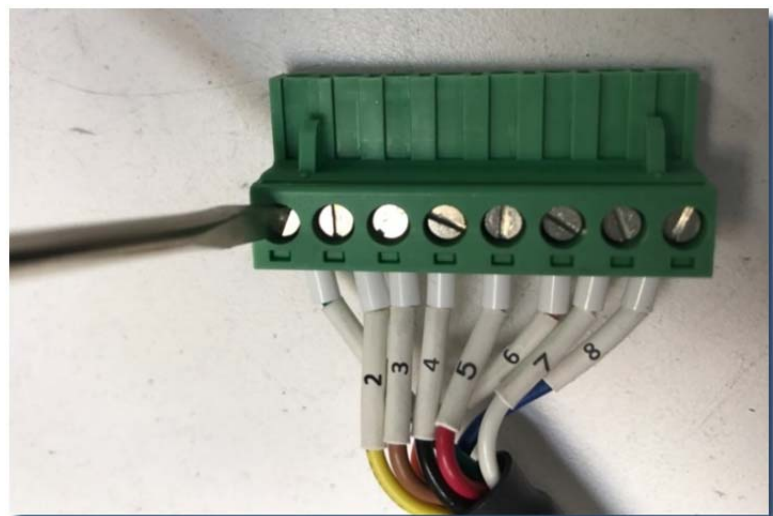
MT86 SENSOR INPUT WIRING
